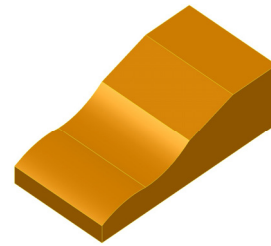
Workpiece model for investigation surface roughness using PowerSHAPE
